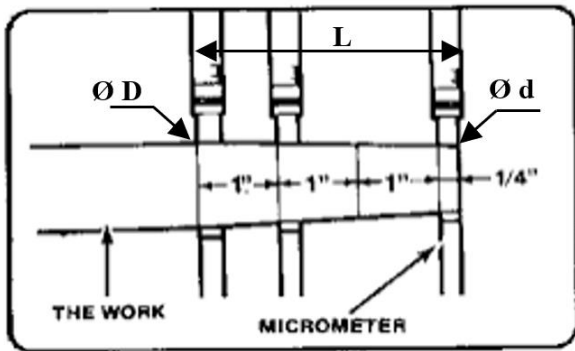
Schematic drawing of tapered workpiece measurement using a micrometer.
